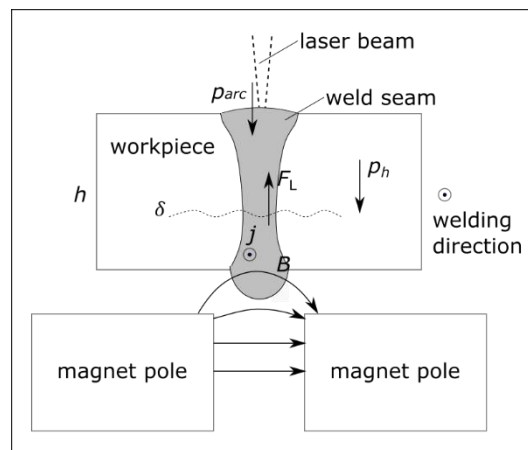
Scheme of hybrid laser arc welding
